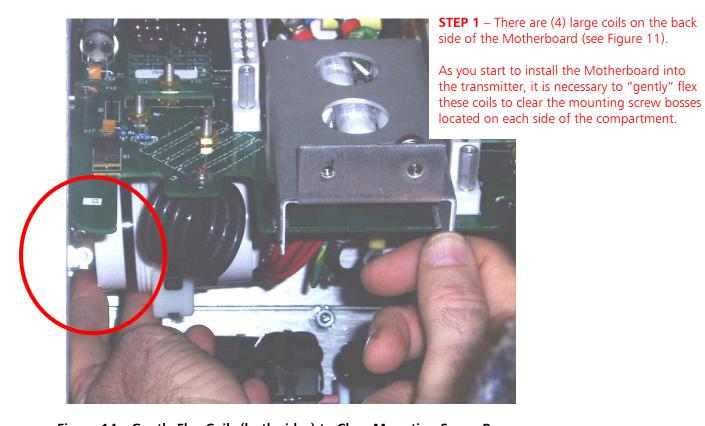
Gently Flex Coils (both sides) to Clear Mounting Screw Bosses
